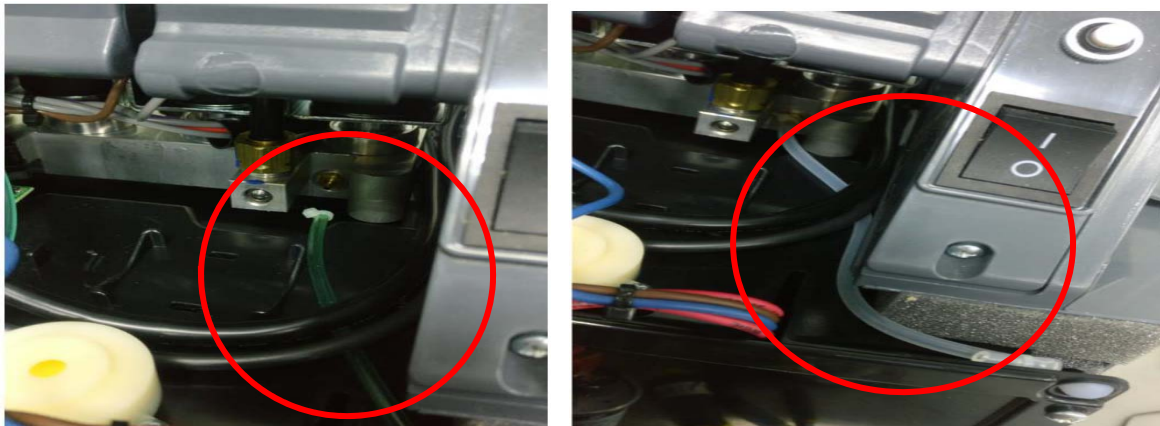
(Left) Old Tube PN TU152-1 or TU152-070 and (Right) New Tube PN 21424242
